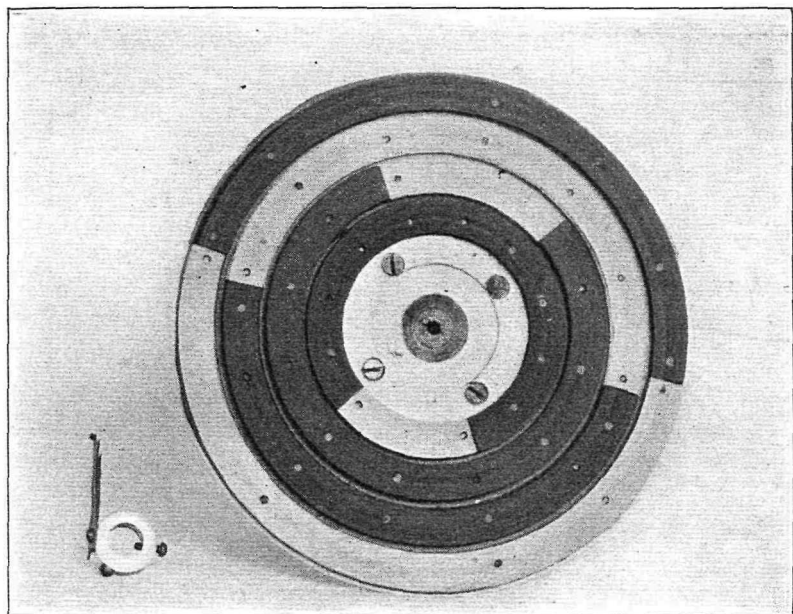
Face of disc commutator; brush showing holder and adjusting screws.
